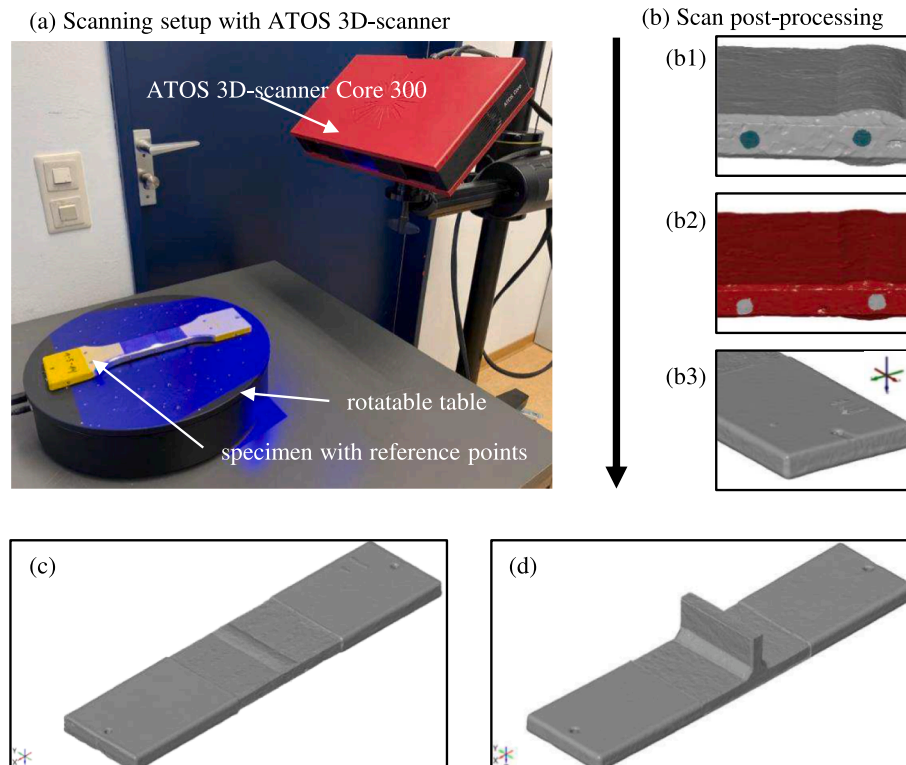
Digital 3D-scans using ATOS Core 300: (a) test setup, (b) scan post-processing (c) scan of butt-welded specimen and (d) scan of fillet-welded specimen.
